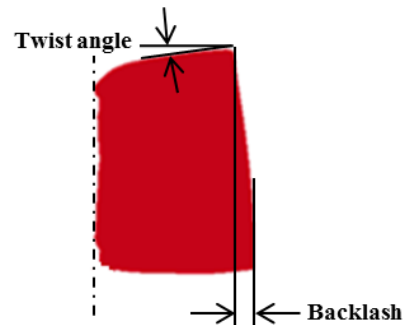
Section shape of sheet metal pin showing twist angle and backlash after shearing
